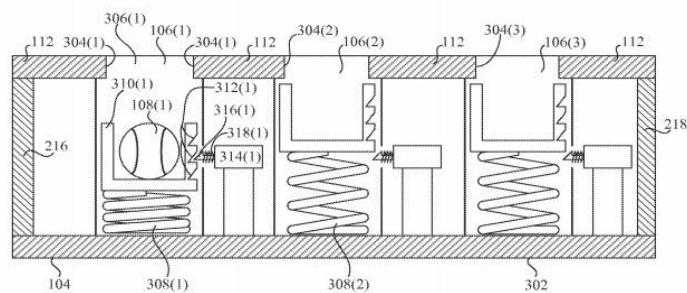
Ball launching apparatus utilizes a solenoid and latch-locking mechanism to hold the compressed spring.
